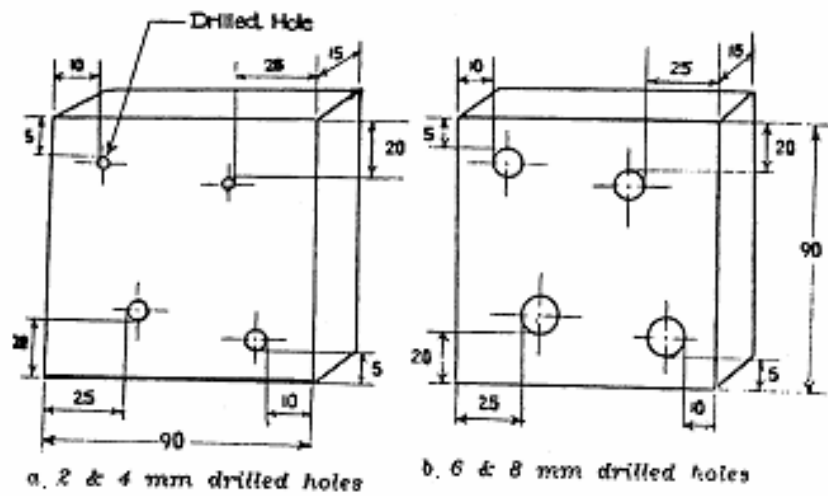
Test samples shape and dimensions with drilled holes and their locations (all dimensions in mms)
